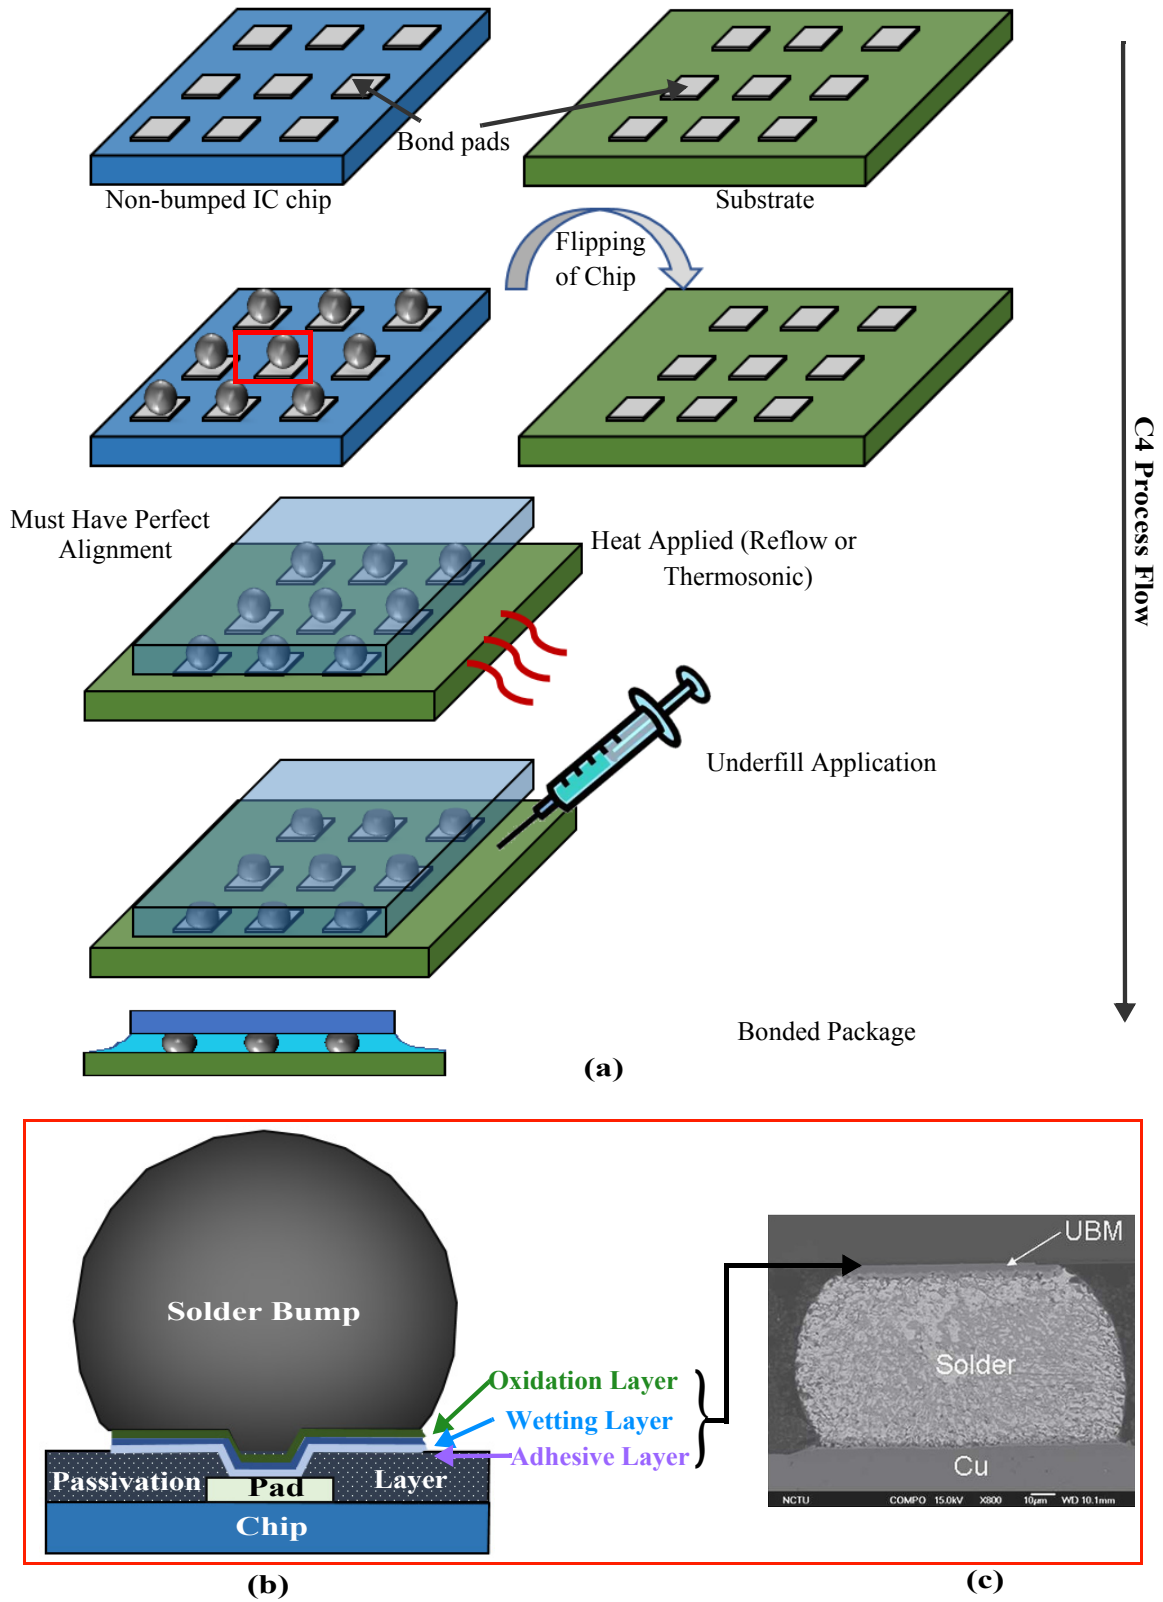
(a) Typical C4 flip chip process; (b) under bump metallurgy (UBM) of a solder bump; (c) Cross sectional view of a bonded C4 joint [13].
